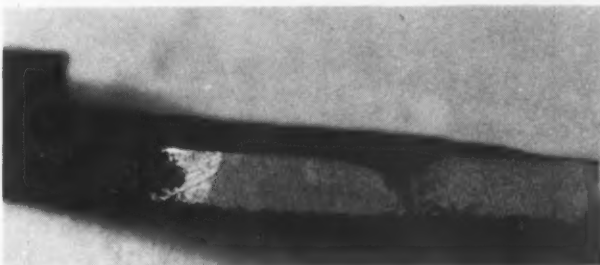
Buckle casting defect due to spalling, the result of high expansion of the facing sand.
